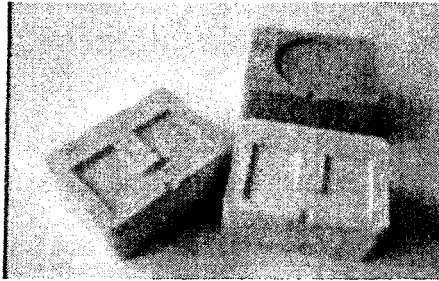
Mould tool produced by 3DP U shape and Cylinder (female)
